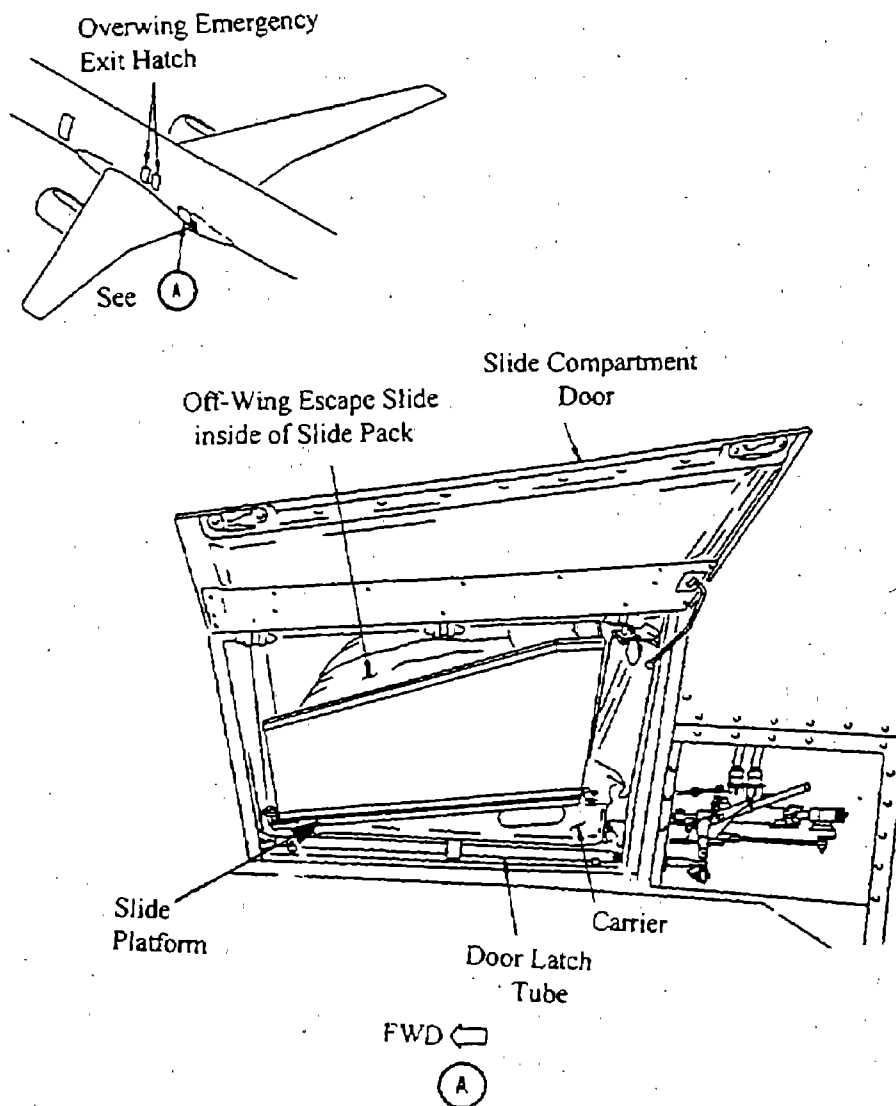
B-757 Off-Wing Escape Slide Assembly
